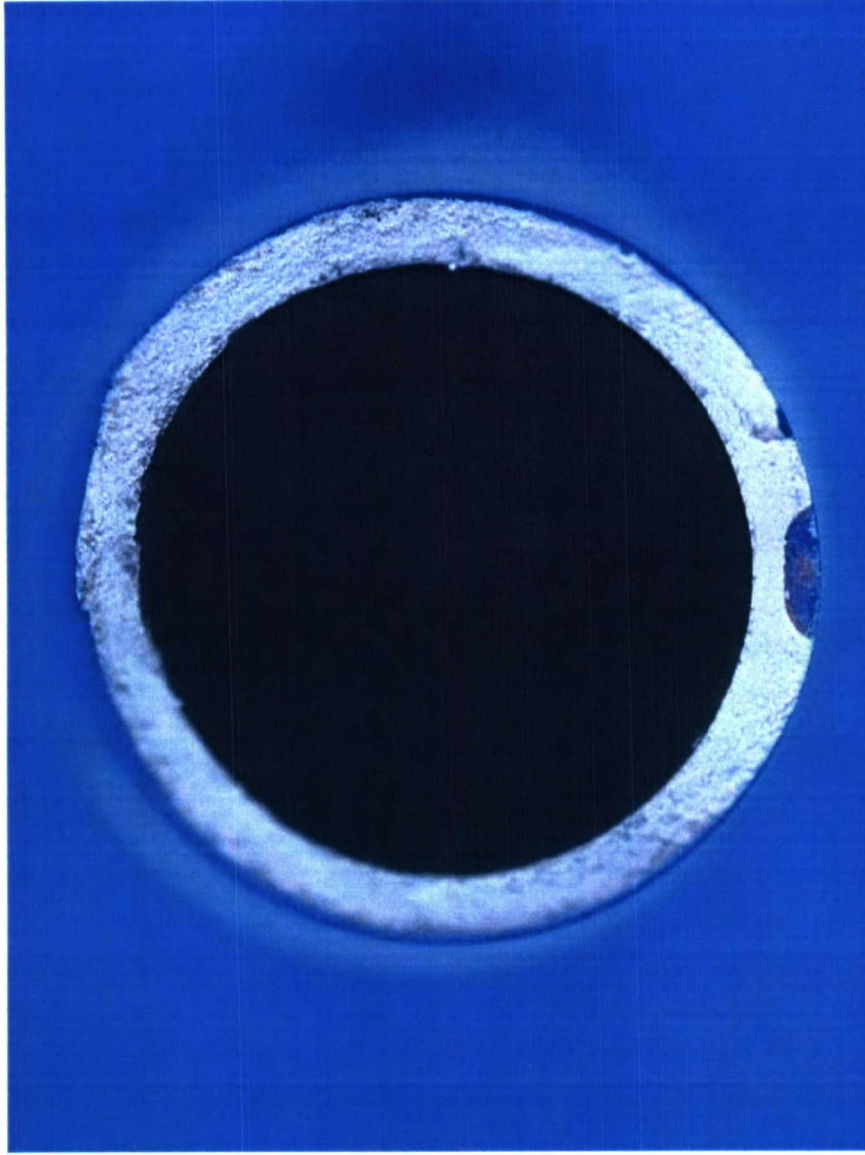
Fracture Surface of Tube, Showing Fatigue Crack Initiation Near  $N_i$
